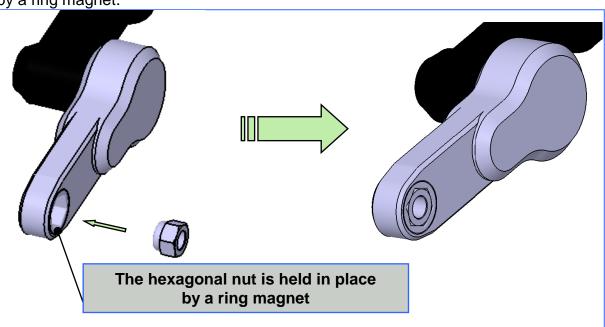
The self-locking hexagonal nut is inserted in the tool
